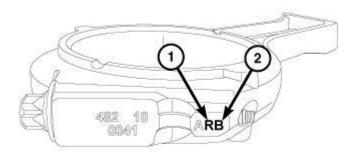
Connecting Rod, Bearings & Bolts Courtesy of CHRYSLER GROUP, LLC
